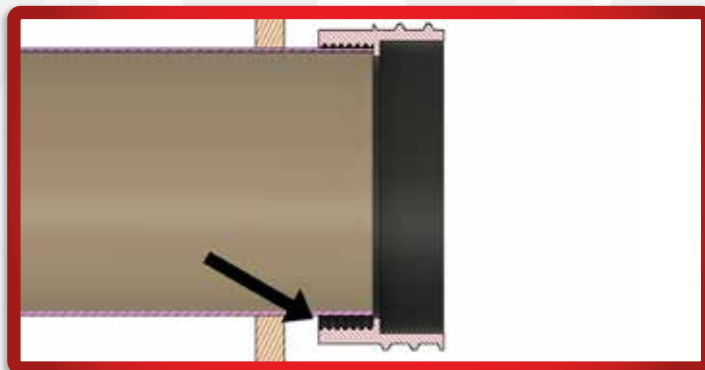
CUT-AWAY SHOWING A RETAINER BODY THAT IS A BIT TOO BIG, AND THE TEETH ON THE FRONT SECTION DON'T CONTACT THE TUBE.
